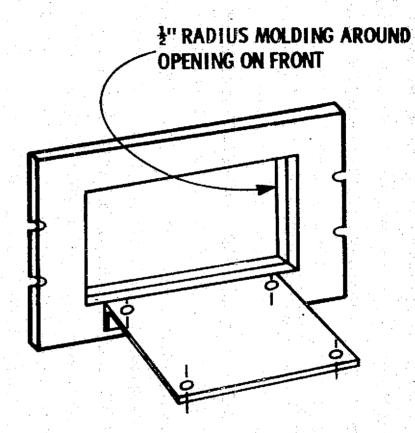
Rack Mount Bracket - Aluminum Alloy 0.125 Thick
